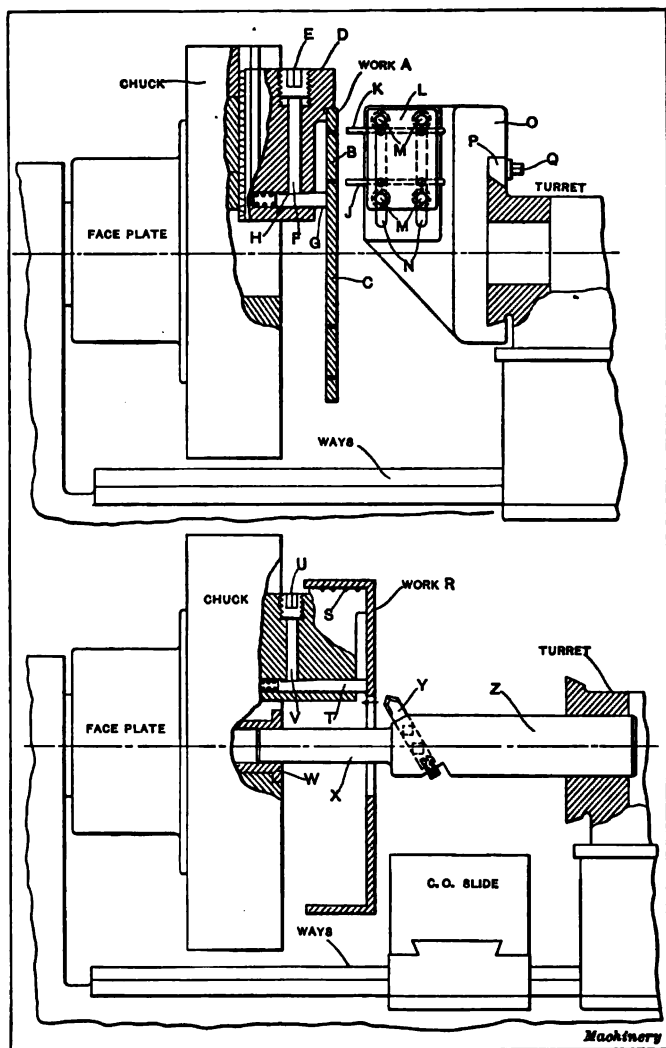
Cutting out a Thin Sheet Steel Collar and Turning, Boring and Facing a Thin Steel Drum
